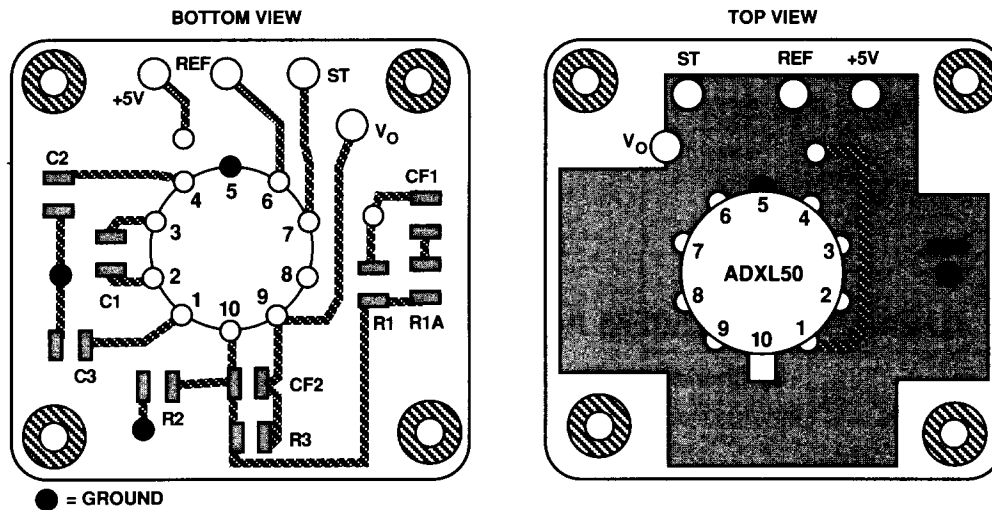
ADXL50EM Module Printed Circuit Board Layout
